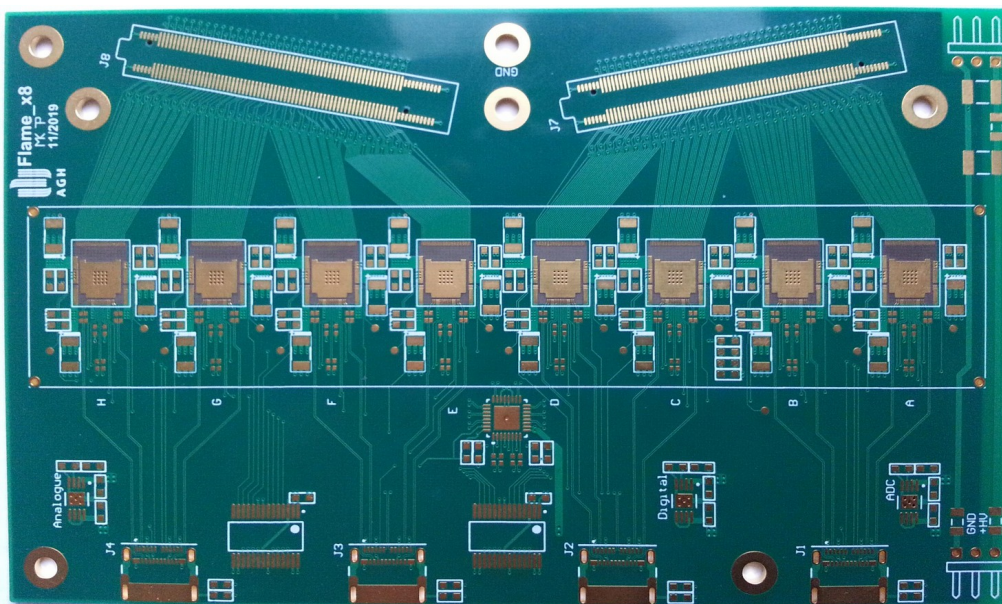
Photograph of compact PCB for 256-channel sensor readout
